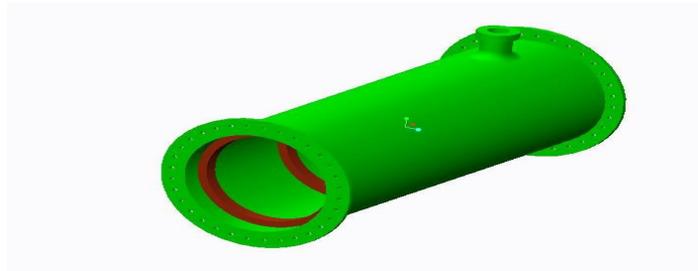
TotalAssemblyBodyCoverandSurgePlates Assembly
